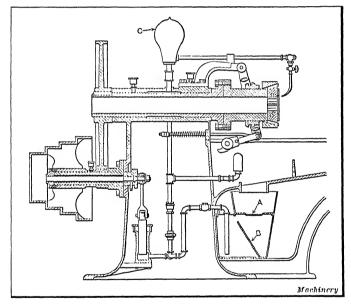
Sectional View of Bolt Threader showing means of Distributing and purifying Cutting Compound
